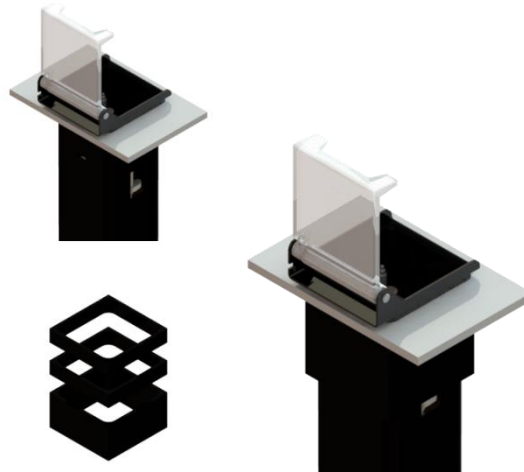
Panel Spacers, Mounting Sleeve and Panel Seal (shown without pushbutton for clarity)
